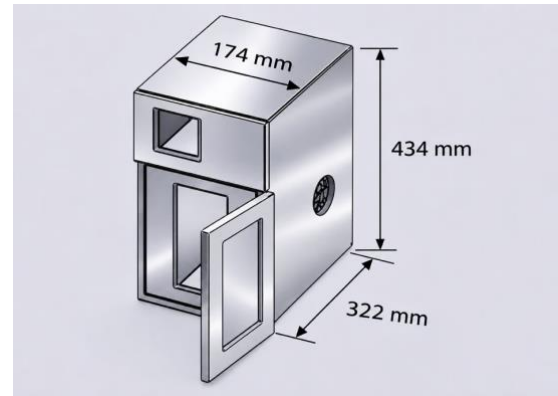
CAD model of the thermoelectric refrigerator casing.
